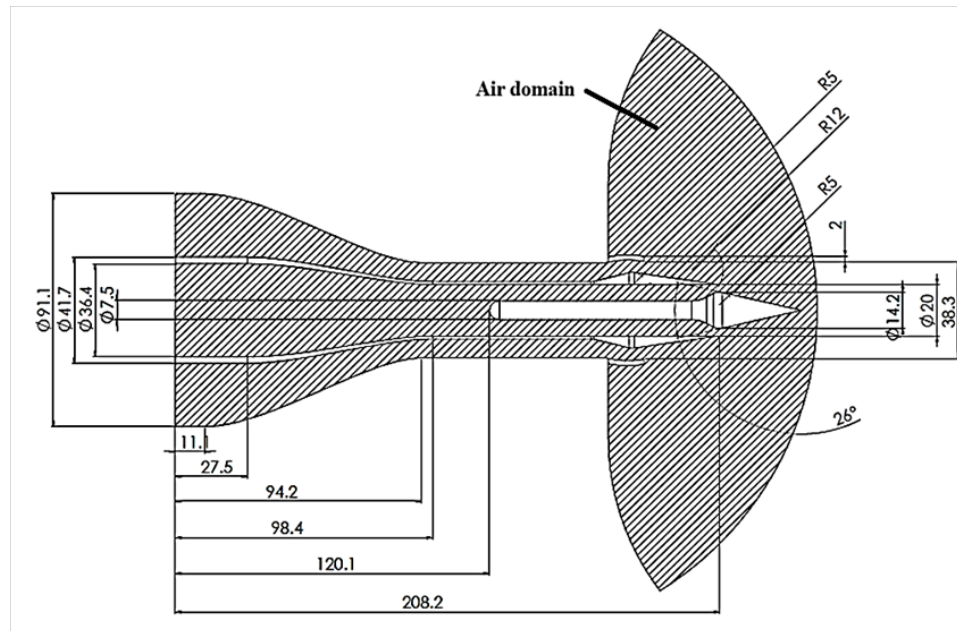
Base nozzle model (2D) - dimensions (mm)
